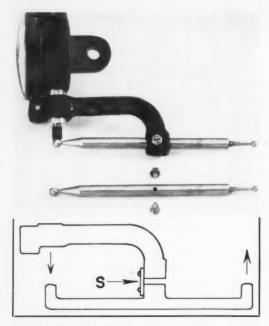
A common mechanism to illustrate another favorite transfer method is the so-called hole attachment shown herewith, which is used as a supplement to a dial indicator on a test set.
